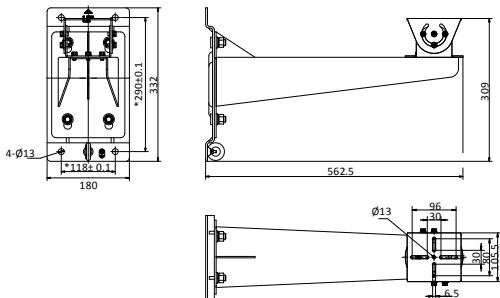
Dimension of a Wall Mounting Bracket Type I (mm)
